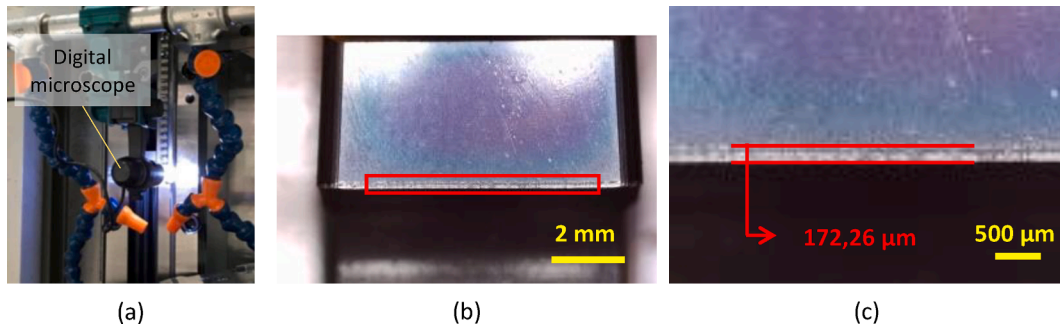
The (a) In situ tool wear acquisition system by an optical camera (b) Broaching tool tooth with flank wear (c) Flank wear VB measurement during broaching cycle.
